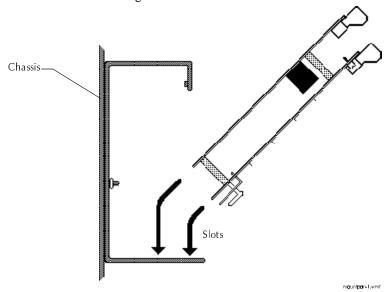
Inserting a Module to a CHS-4 Chassis
